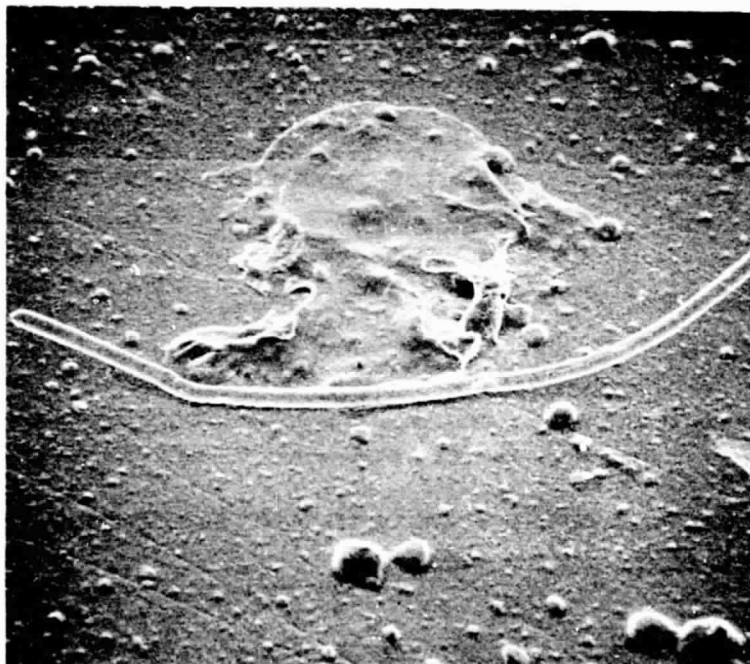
Aluminum wire 0.025 mm (0.001 inch) diameter captured by tape during PIN testing.
